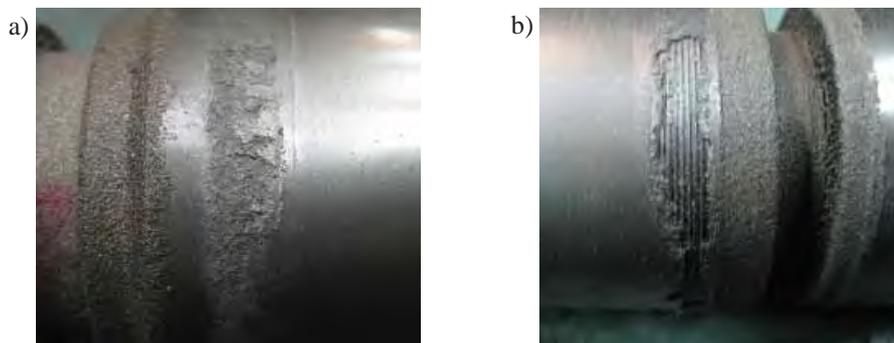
Coatings surface ($F_n = 1100$ N, $f_n = 0.08$ mm/rev, $V_n = 28.26$ m/min) [9]: a) Ni-5%Al after three burnishing, b) Ni-5%Al-15%Al₂O₃ after a single burnishing
